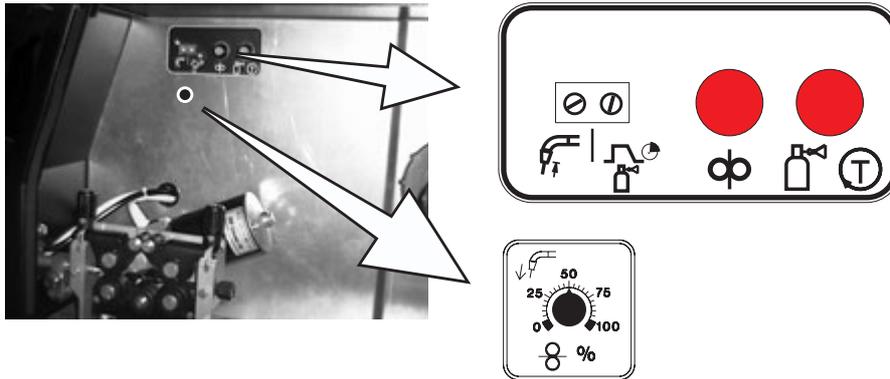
/2 Setting options in the welding machine or WF case
